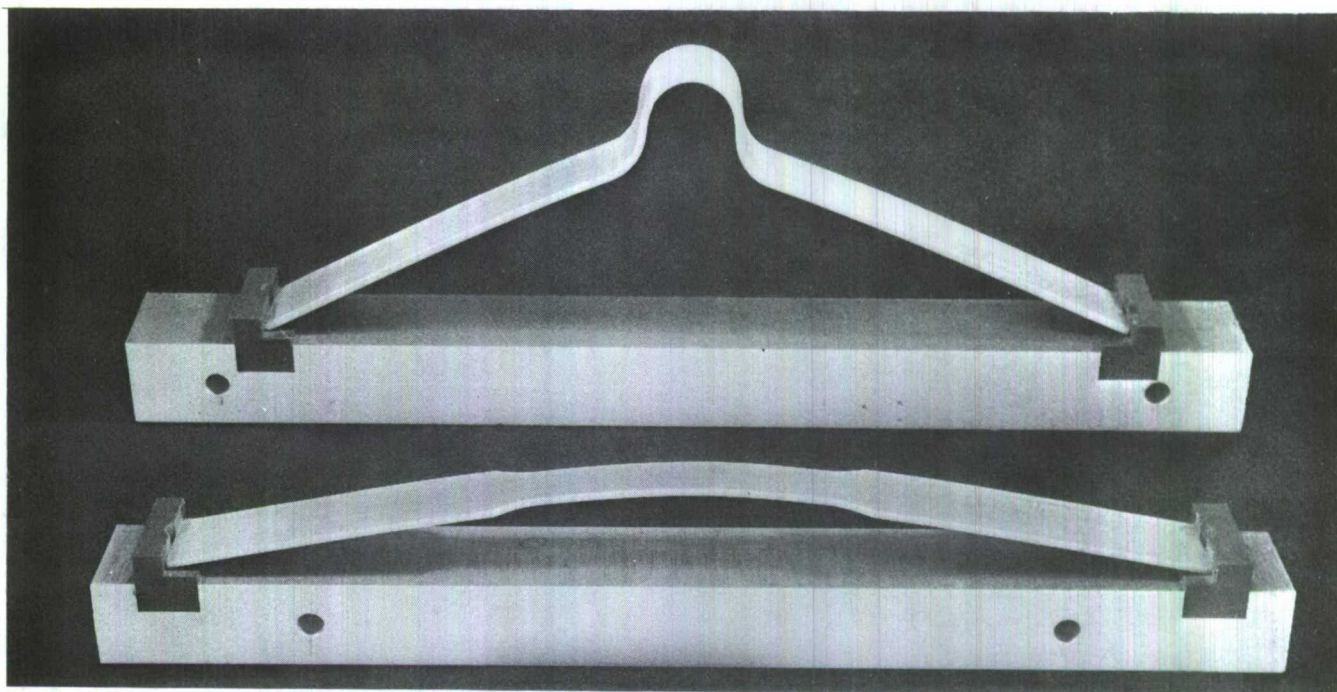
Sheet-Type Tensile Specimens and Preformed
